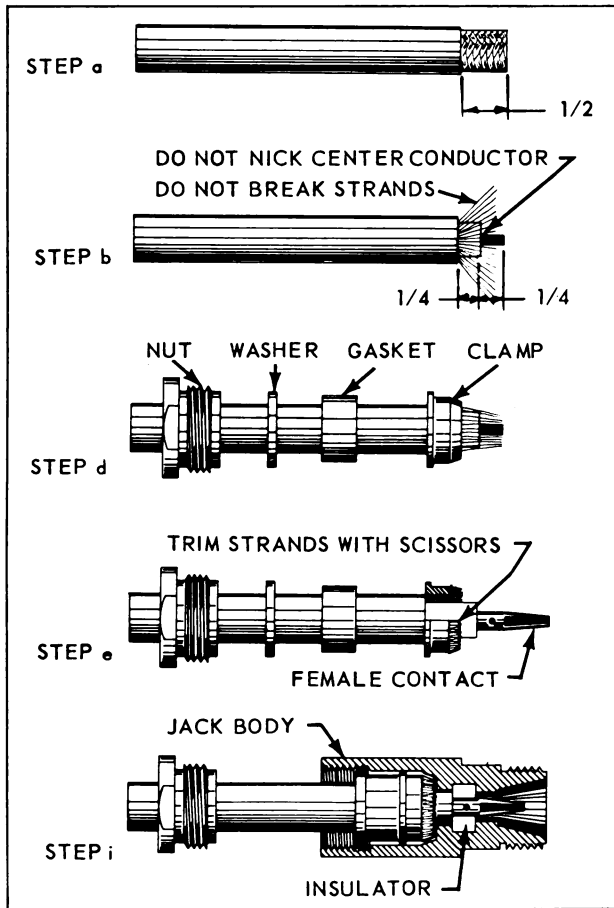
Attaching Standard N Connectors to Coaxial Cable
